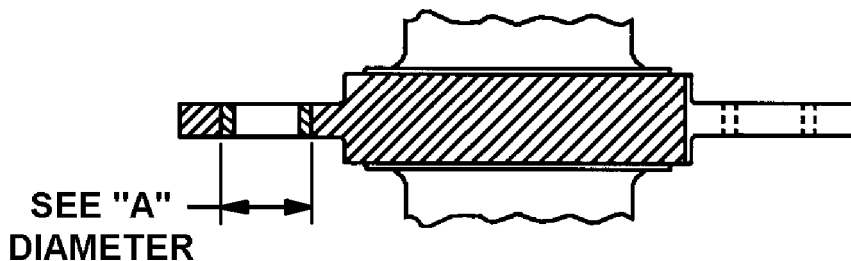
CRANKSHAFT HANGER BLADE BUSHING BORE INSPECTION
